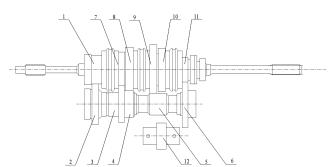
The whole view of the shafting of the gearbox for GAZ-3110, 31105 (1 - main drive gear, 2 - countershaft driven gear of the 3<sup>rd</sup> gear action, 4 - drive gear of the 2<sup>nd</sup> gear action, 5 - drive gear of the 1<sup>st</sup> gear action, 6 - drive gear of the 5<sup>th</sup> gear action, 7follower gear of the 3<sup>rd</sup> gear action, 8 - follower gear of the 2<sup>nd</sup> gear action, 9 - follower gear of the 1<sup>st</sup> gear action, 10 - follower gear of backward motion, 11 - follower gear of the 5<sup>th</sup> gear action, 12 - idle gear of backward motion's shaft)
